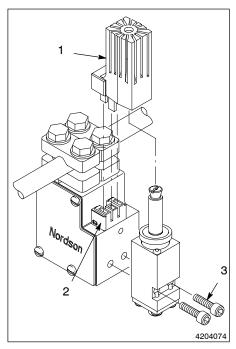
Removing the Gun Module and Coil from the Manifold
